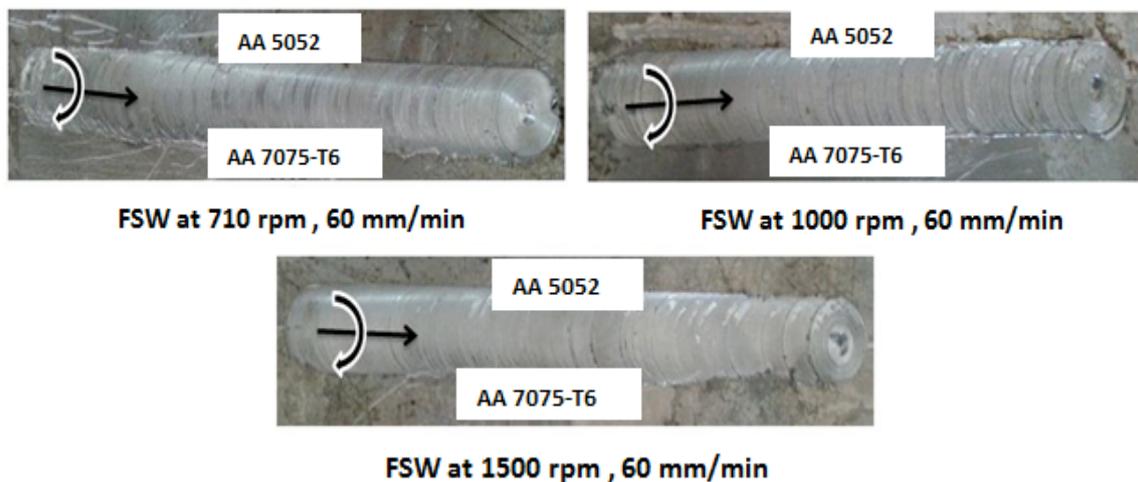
Welding Line Surfaces for All FSW Specimens
